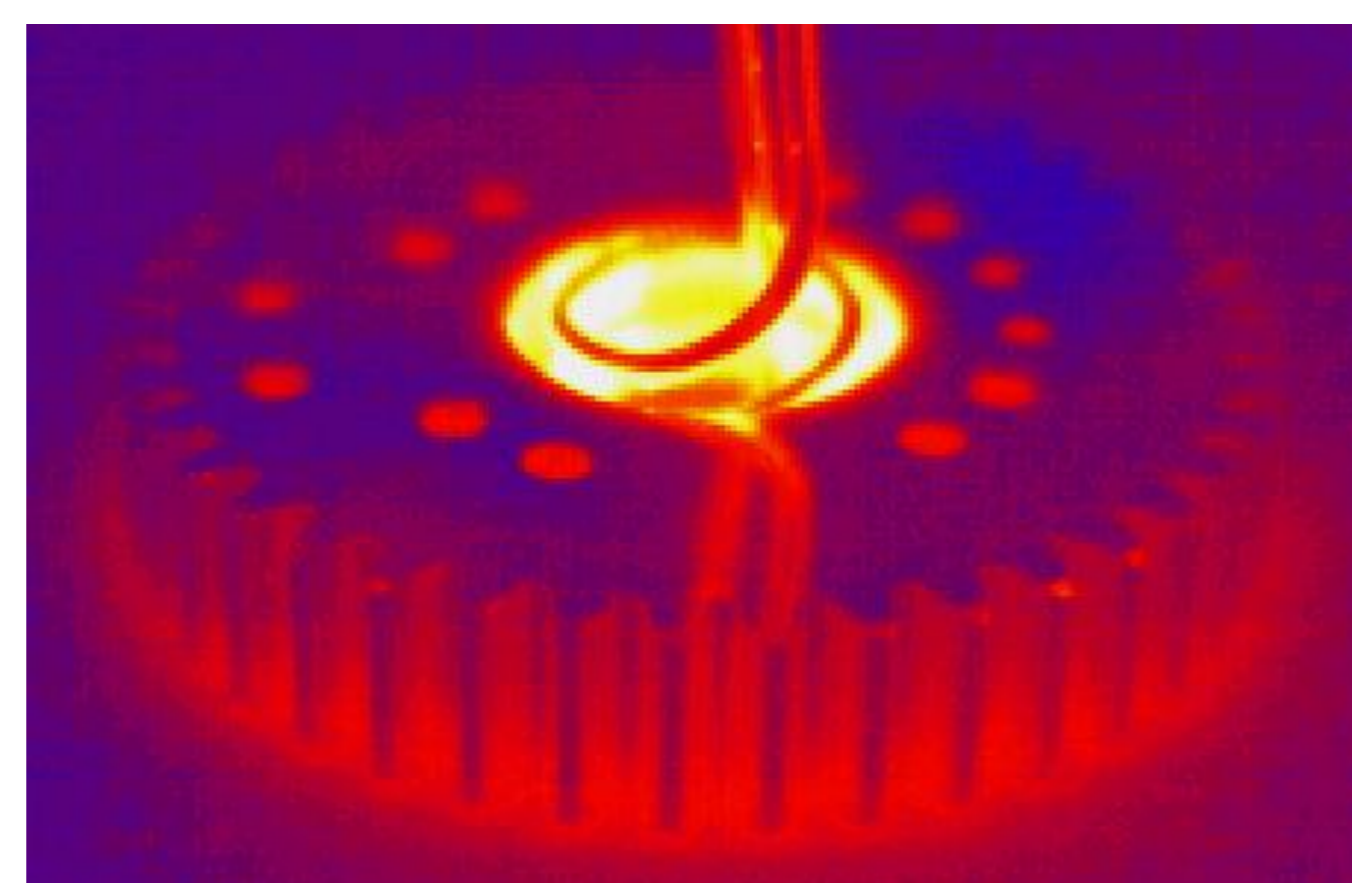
Thermographic investigation of the gear wheel and the induction coil after 5 s of electromagnetic heating.
